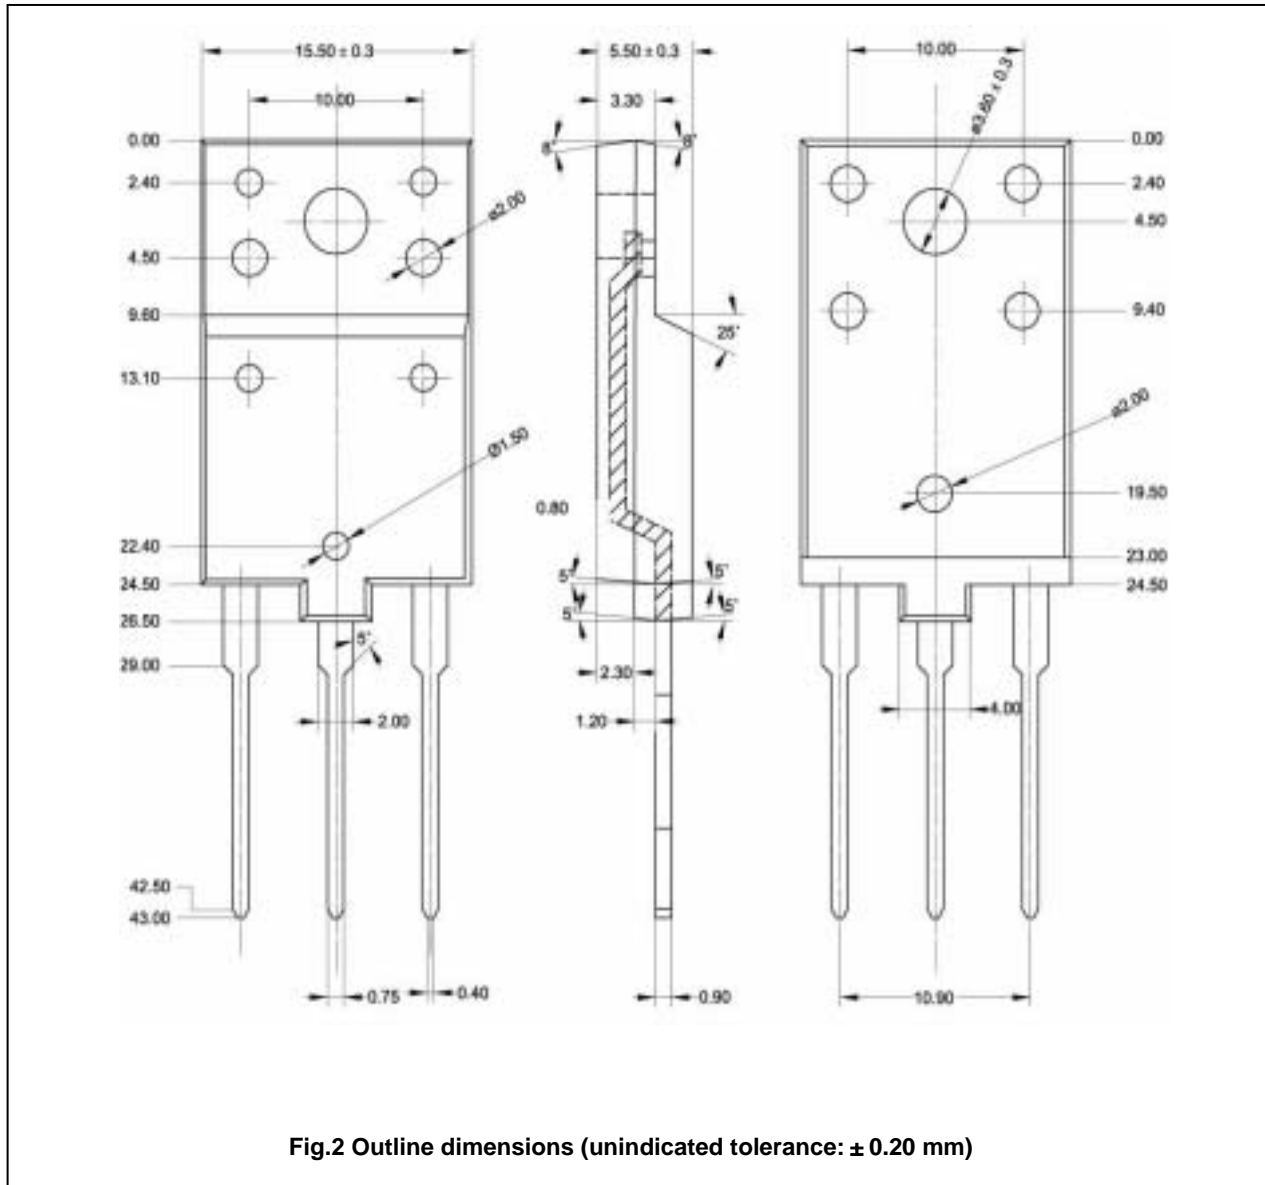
Outline dimensions (unindicated tolerance:  $\pm 0.20$  mm)
